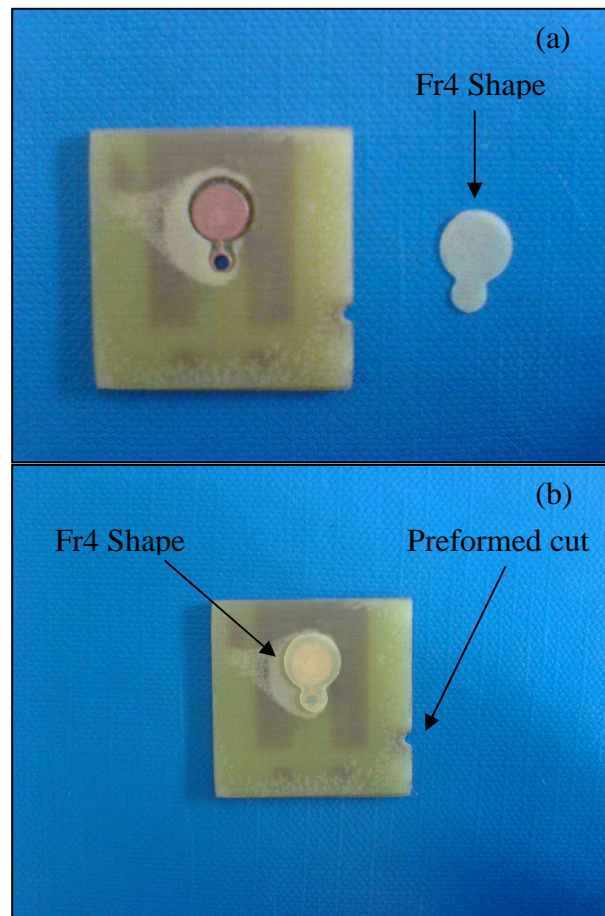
Spacer layers fabricated for different sensor prototypes dimension.
